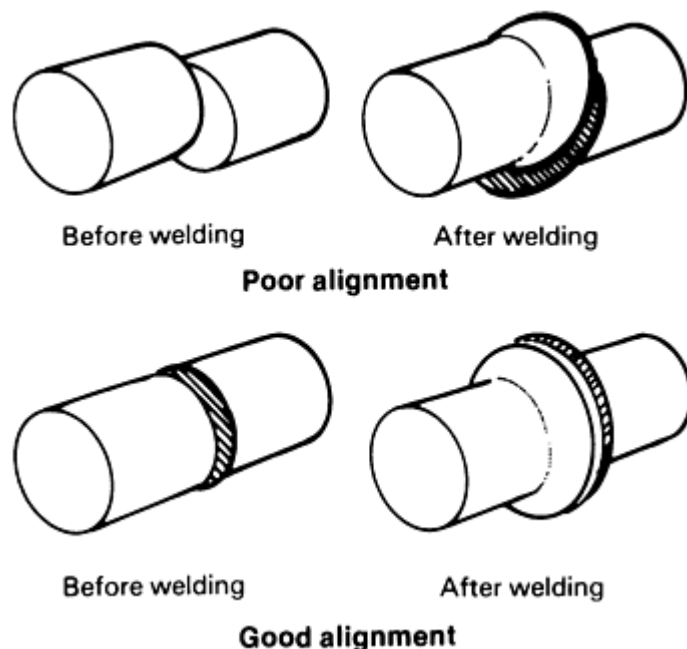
EFFECT OF WORKPIECE ALIGNMENT ON JOINT QUALITY AND WELD UPSET
